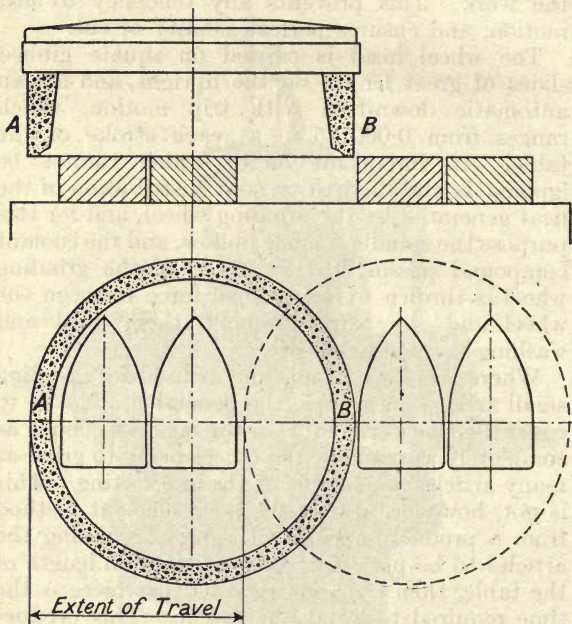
GRINDING SAD IRONS ON VERTICAL-SPINDLE SURFACE GRINDER
